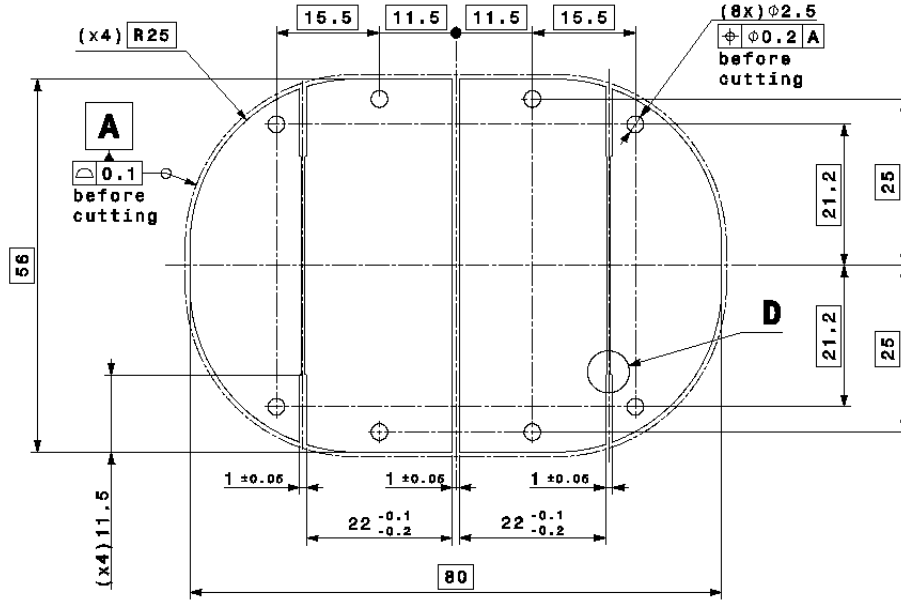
Production drawing of the H^0H^- plates with dimensions and tolerances.
